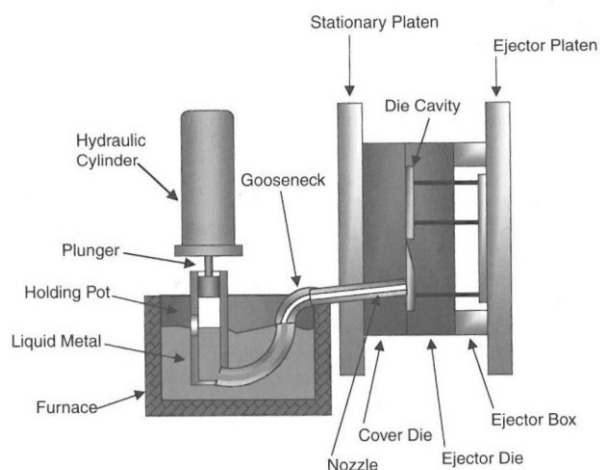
Graphical illustration of a hot-chamber die casting machine.
